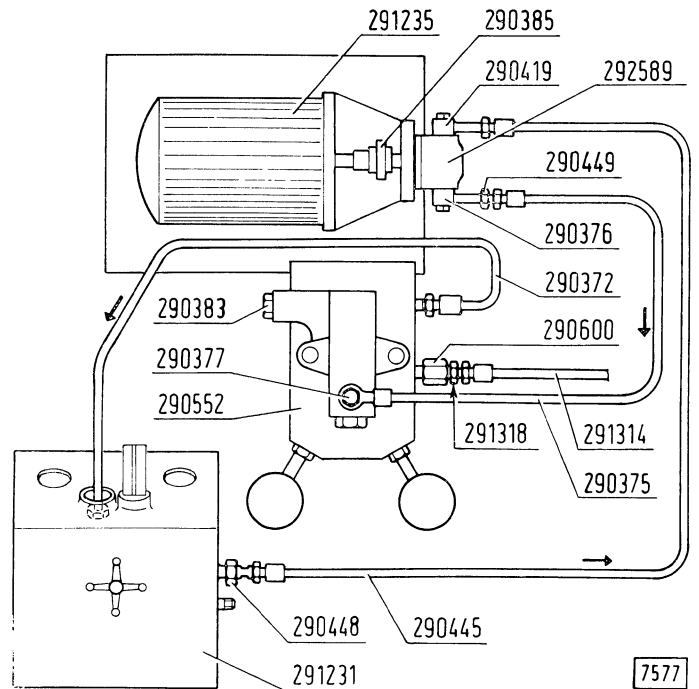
Gearbox Clutch Oil Pressure Regulating Valve Test Equipment
